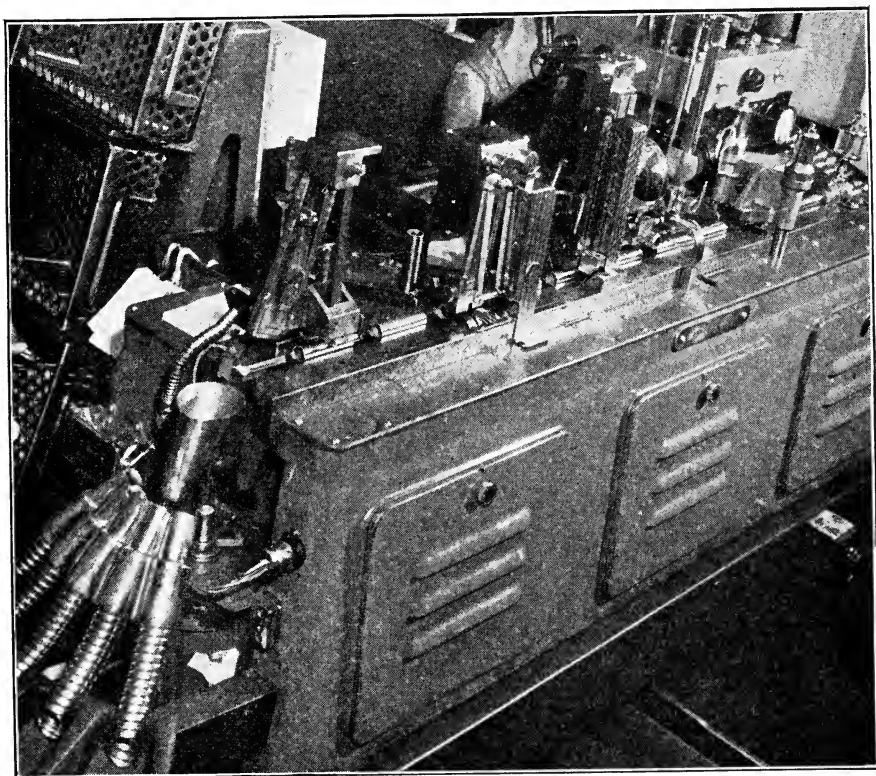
This piston pin gauging machine automatically checks six measurements and sorts the pins into sizes varying only  $1/10,000$ th of an inch, discarding any that are over or under tolerance. The pins are fed into the machine at the right, travel through the gauging mechanisms, and drop into the sorting tubes at the left. (Courtesy of Ford Motor Company.)
